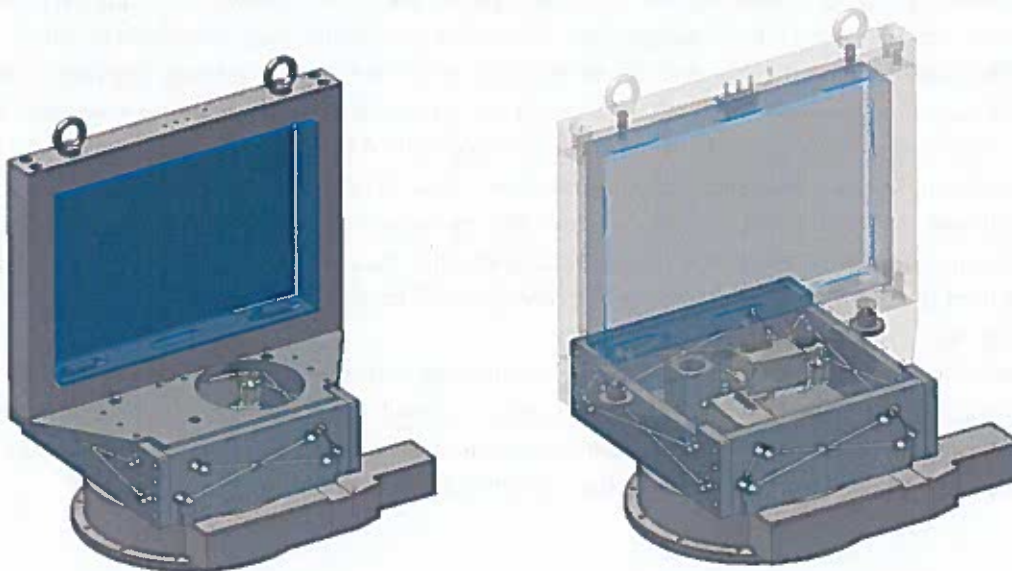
Overall and cutaway view of the optomechanical design of grating mount Type GR1/4.
